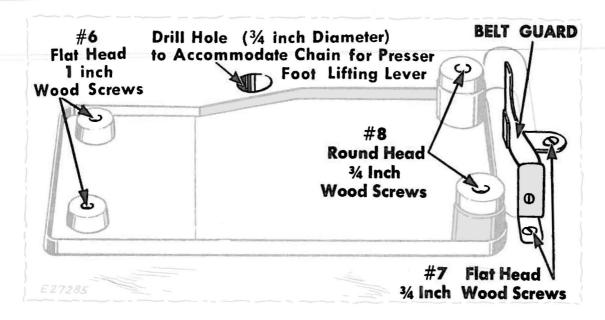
Machine Base on Table, Showing Position and Drill Sizes of Holes Required for Installation
